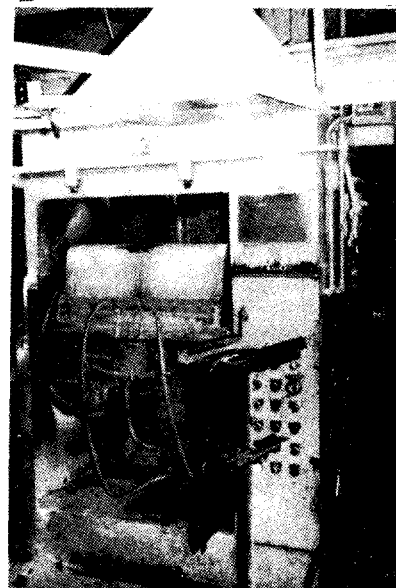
Shell mold machine surrounded by enclosing hood.
